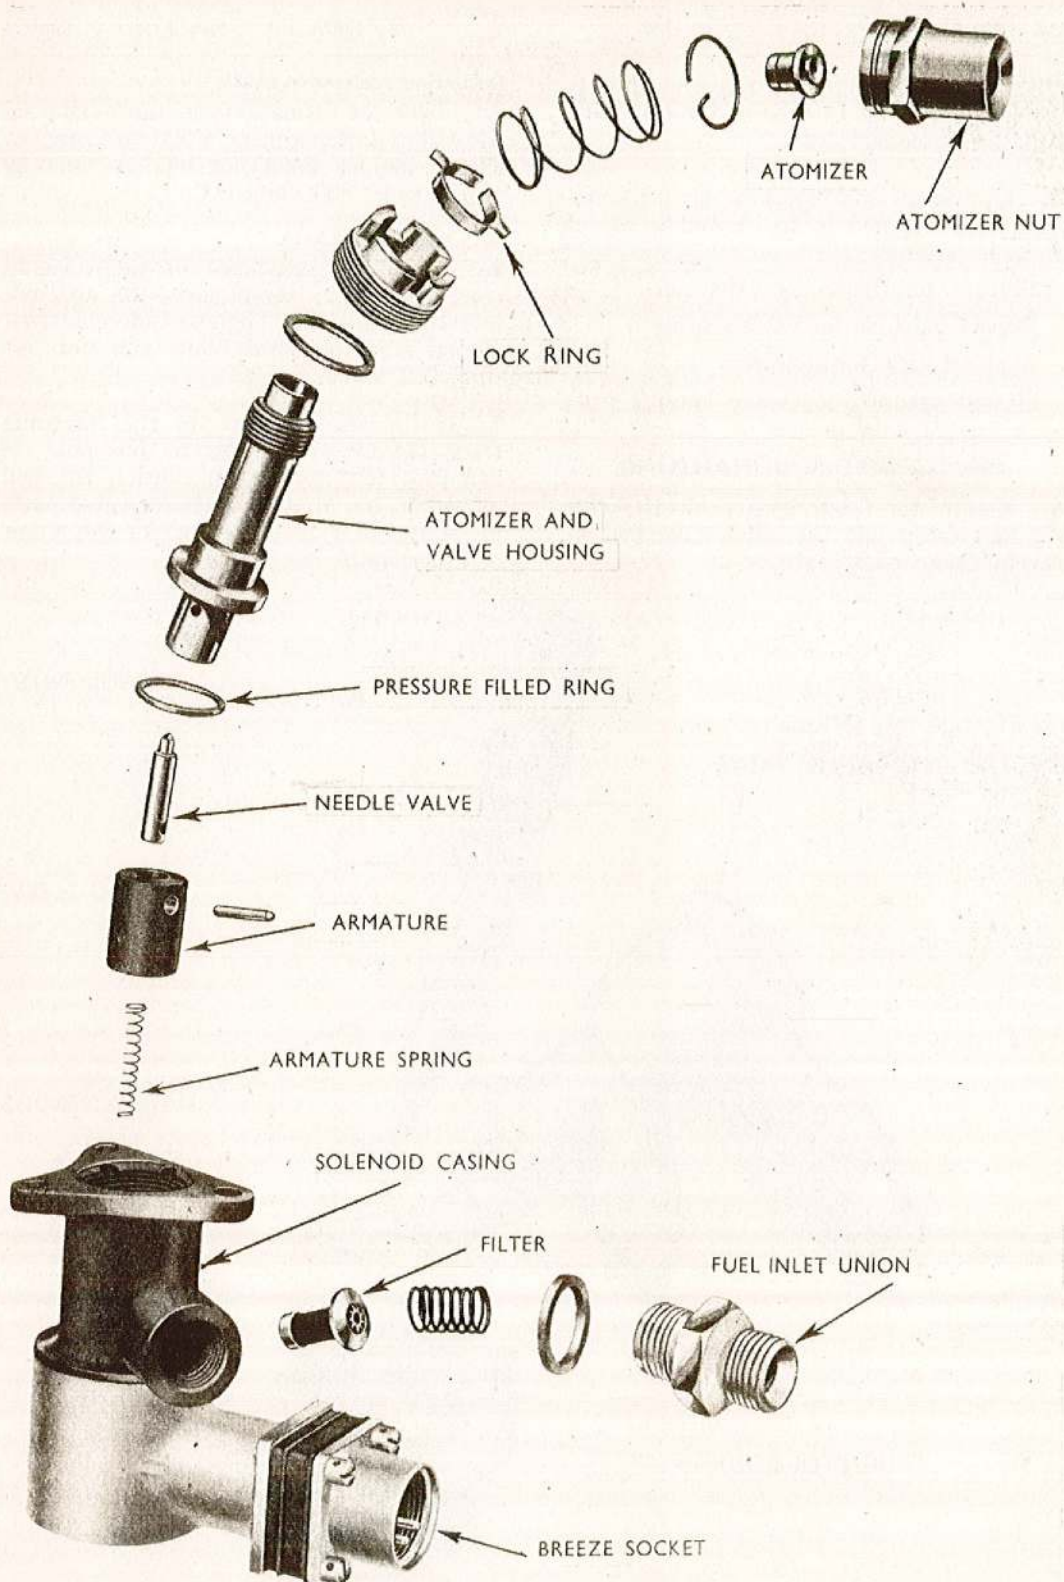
EXPLODED VIEW OF ELECTRO-HYDRAULIC VALVE
